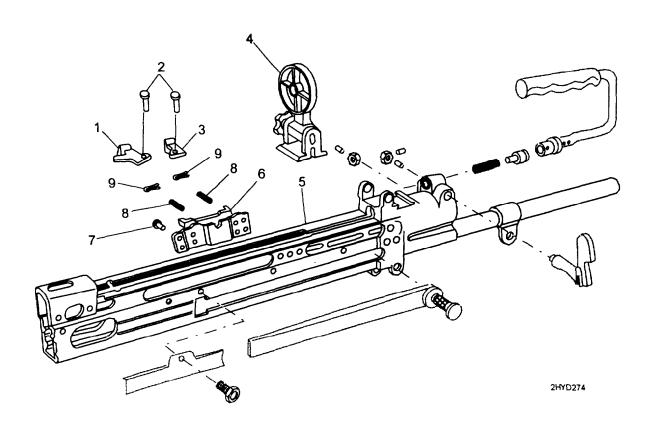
Group 00 Machine Gun, 7.62-MM M60 and M60D (M60D Major Assemblies), PN 7269100 and PN 11699750
